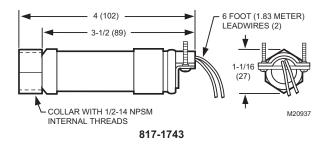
Ultraviolet detector, mounting dimensions in inches (mm).
